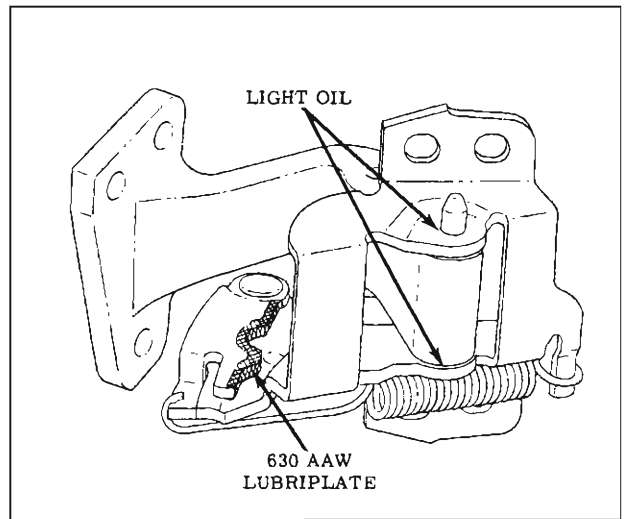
Front Door Hinge (3300 through 3900 Series)
